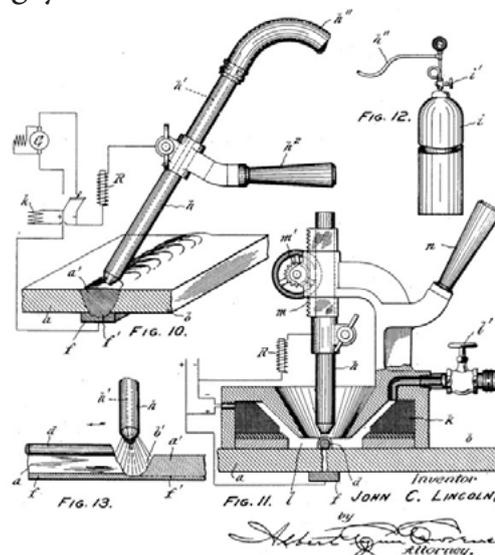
Patent by J.P. Lincoln, no. 1589017 “Method and means for electric-arc welding”; 15.06.1926 [24]
